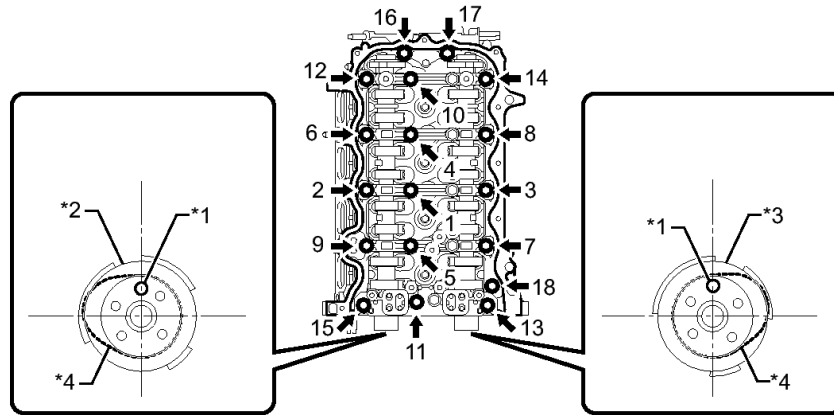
Identifying Setting Camshafts to Positions Shown & Camshaft Housing Bolt Tightening Sequence
